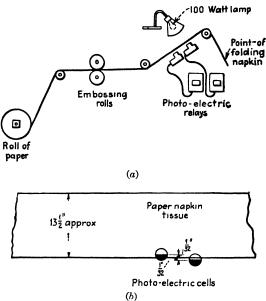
(a) Sketch of a paper-napkin cutting and folding operation in which the paper alignment is checked by two phototubes. (b) Location of the phototubes with respect to the guiding edge of the paper.
